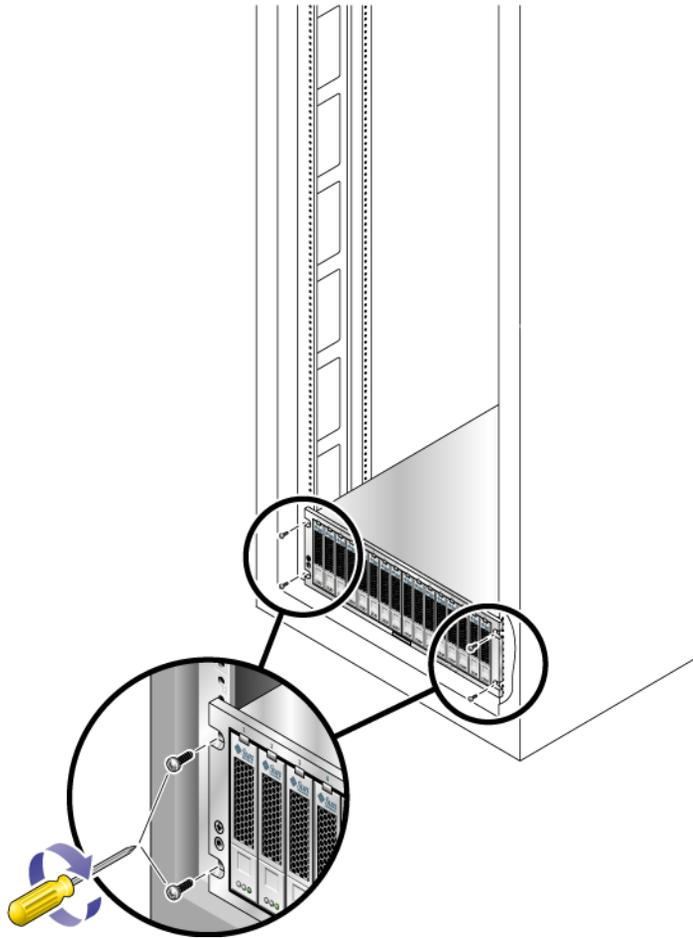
Securing the Tray to the Front of a Sun StorEdge Expansion Cabinet
